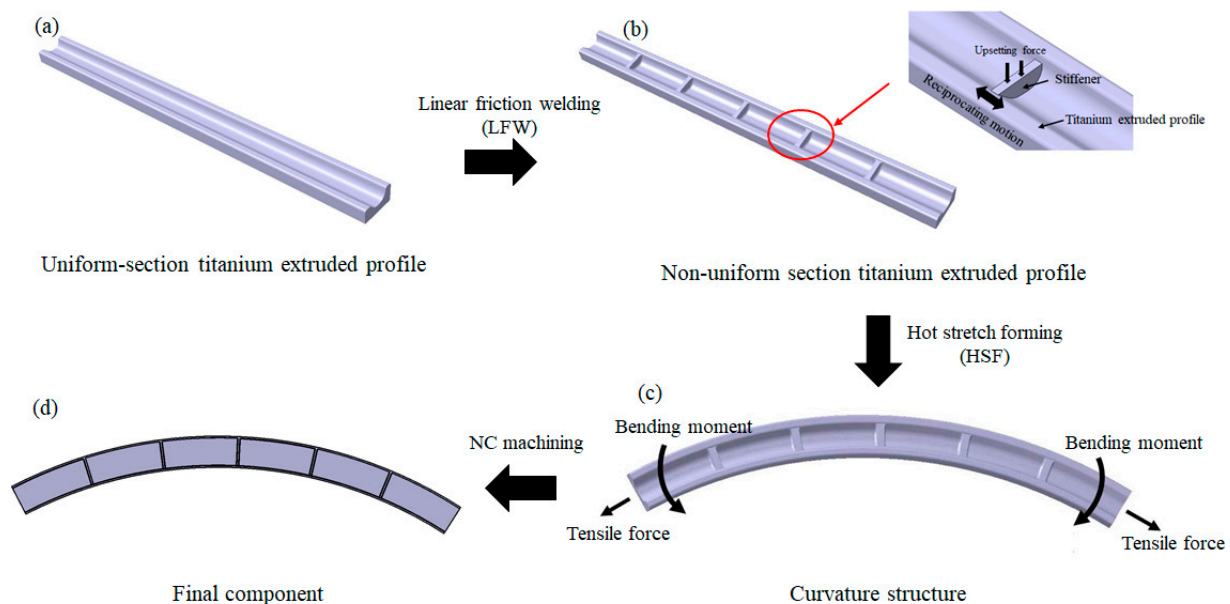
Schematic diagram of linear friction welding and hot stretch bending composite forming process (a) Titanium extruded profile; (b) Linear Friction Welding process; (c) Hot Stretch Forming process; (d) Final component.
